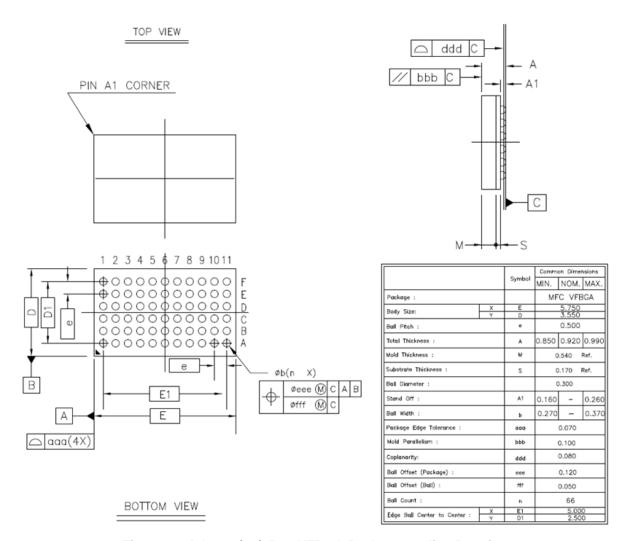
DA9213/14/15 66 VFBGA Package Outline Drawing
